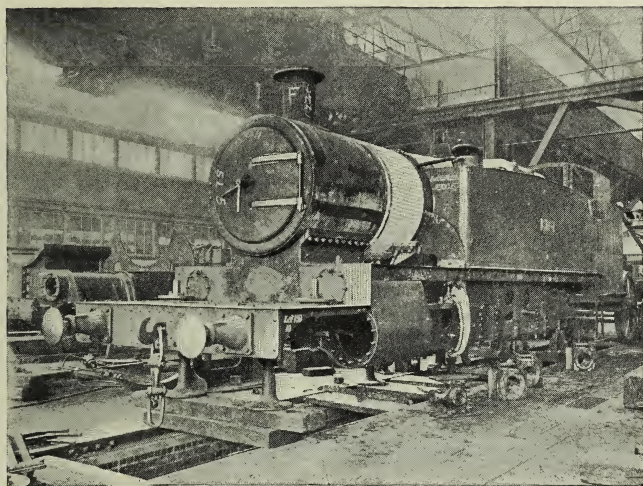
In the Erecting-shop. The boiler, cylinders, and tanks in position.
